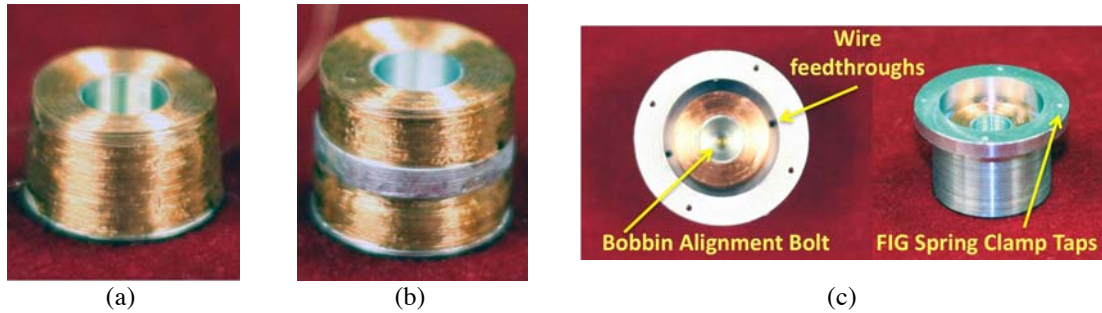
Photographs of a) coil type 1, b) coil type 2, and c) assembled transducer enclosure.
